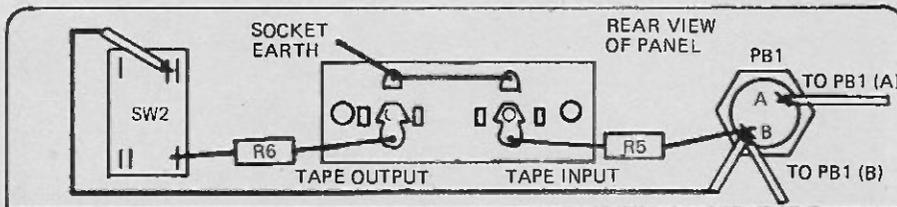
This drawing shows components and wiring on the front panel of the unit.
